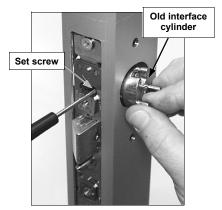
Loosen set screw before removing the old interface cylinder (if present)
